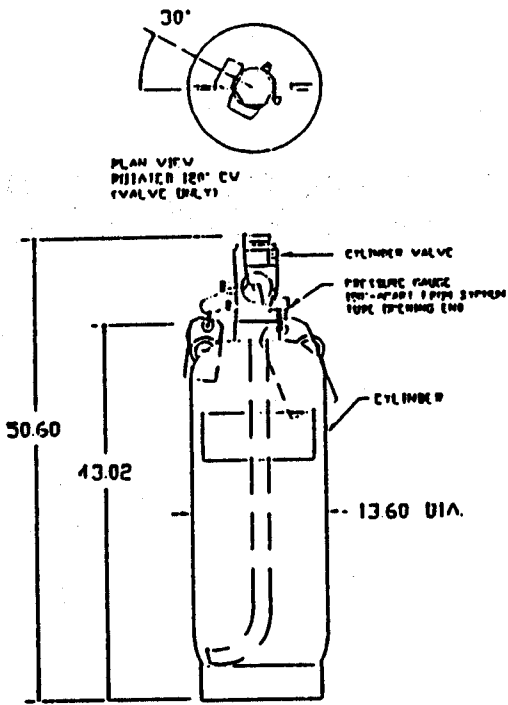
Halon 1301 Cylinder/Valve Assembly, 200 lb., Horizontal Mounting
